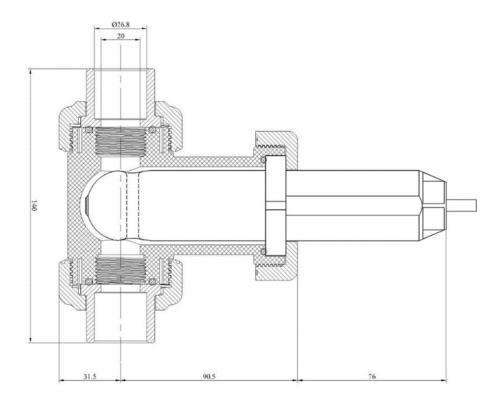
Dimension of the ST-587 and the ST-001 Tee Assembly (mm)
